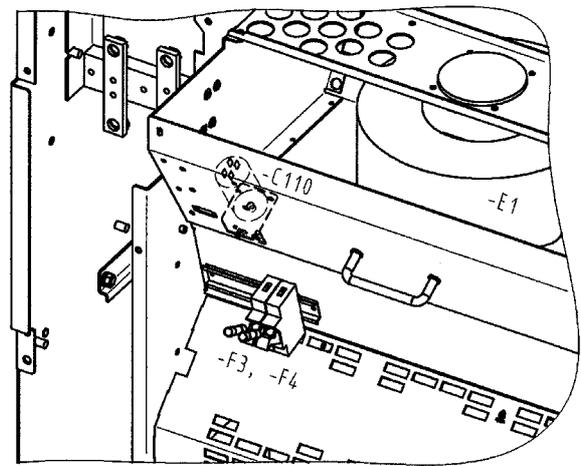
Fan assembly -E1, fan transformer primary fuses, starting capacitor -C110
